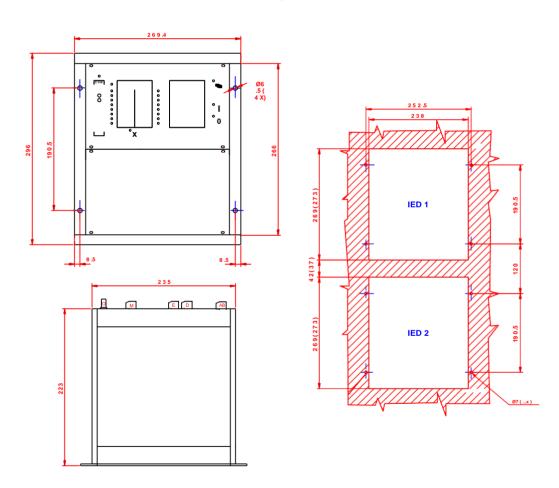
Dimensions for flush mounting of 42 HP double rack
